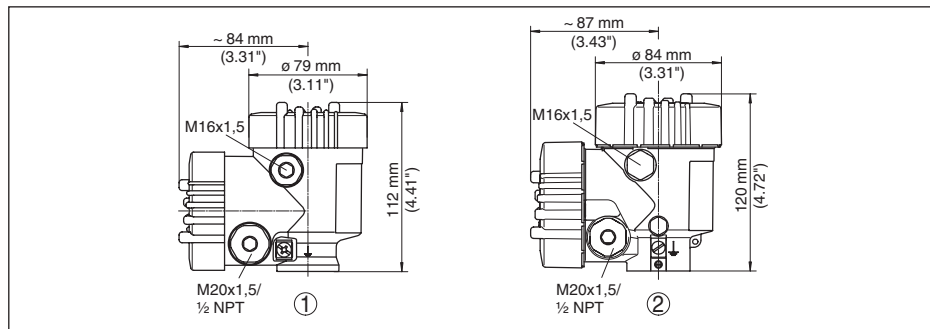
Dimensions of housing - with integrated display and adjustment module the housing is 9 mm/0.35 inches higher
